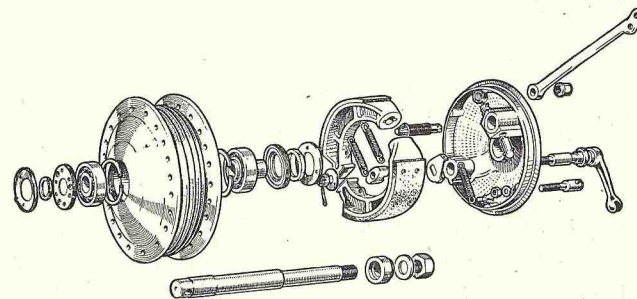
EXPLODED VIEW OF FRONT-WHEEL HUB ASSEMBLY—
